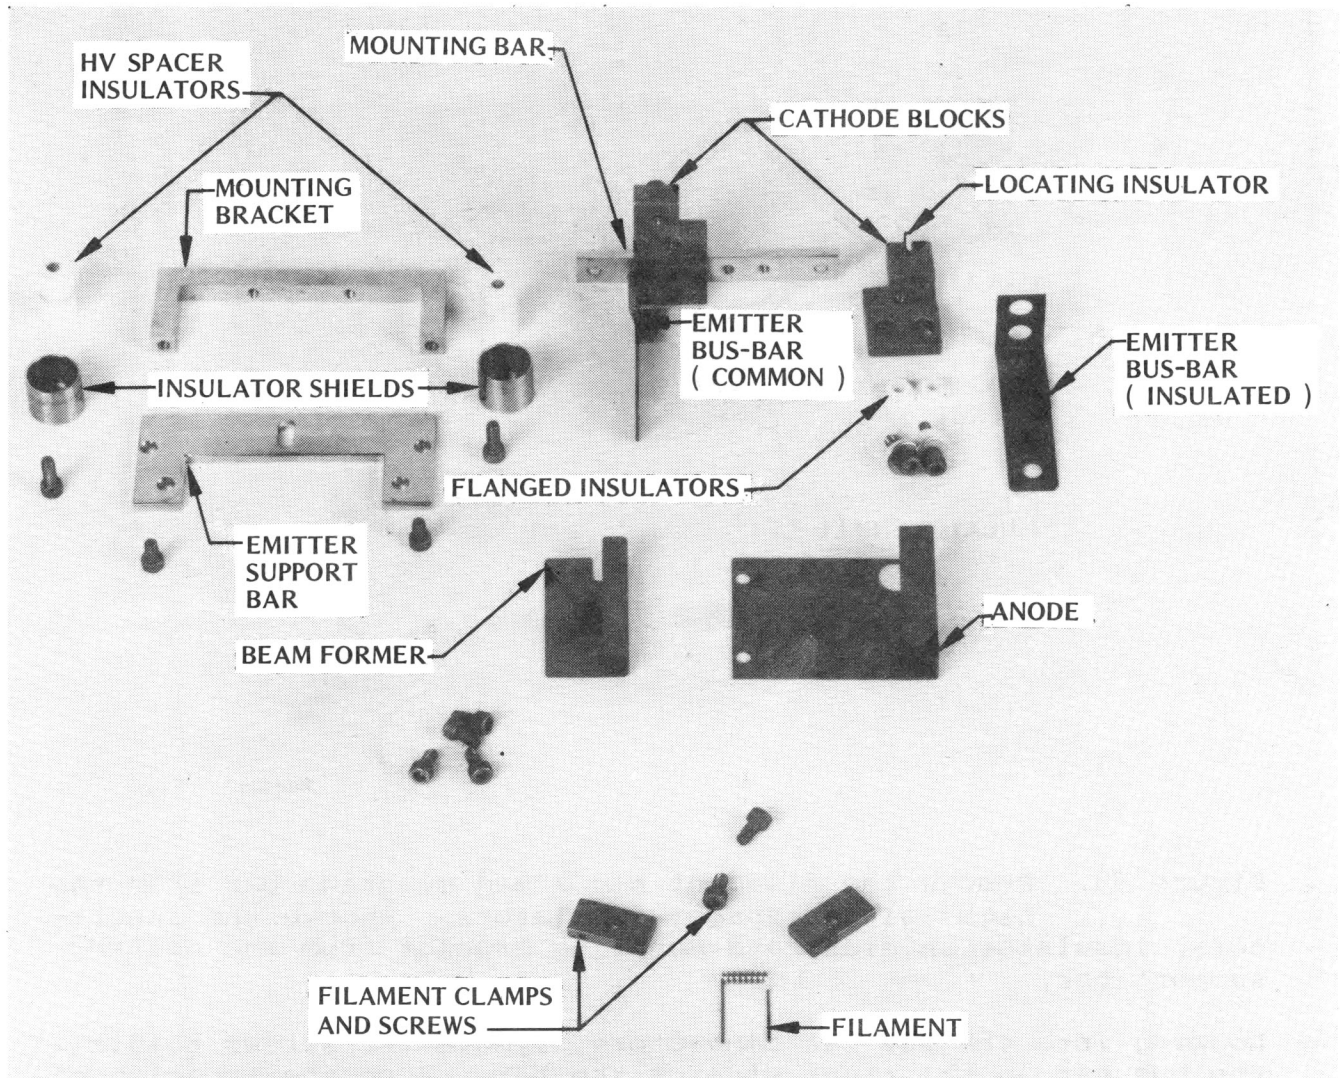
Loosen the screw (holding the beam former) enough to slide it off the assembly.
